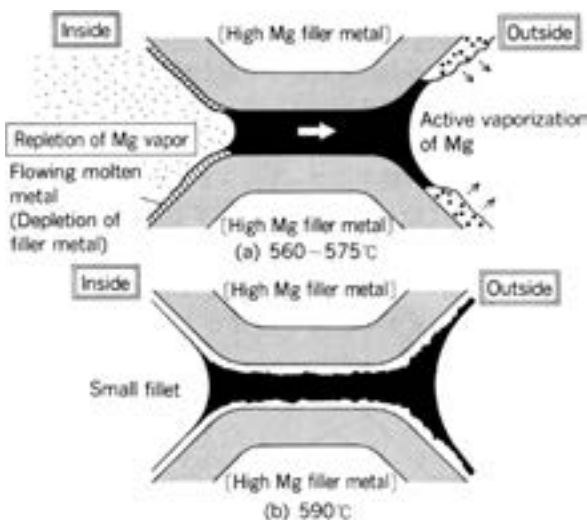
Schematic illustration of fillet formation mechanism at brazed joint of cup specimen.²⁰⁾
